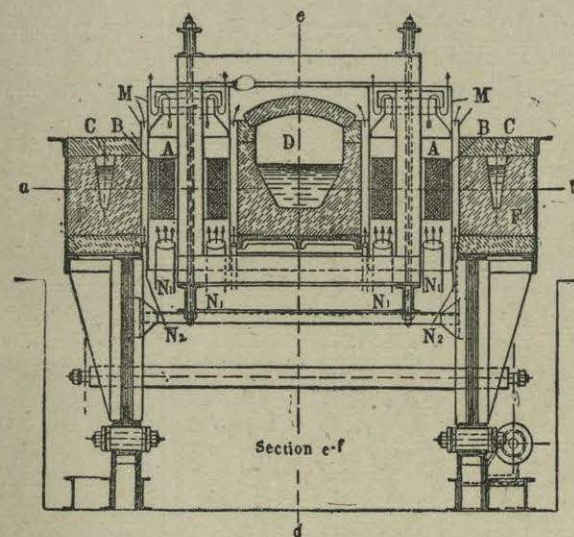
Sectional Elevation of Röchling-Rodenhauser Furnace.
